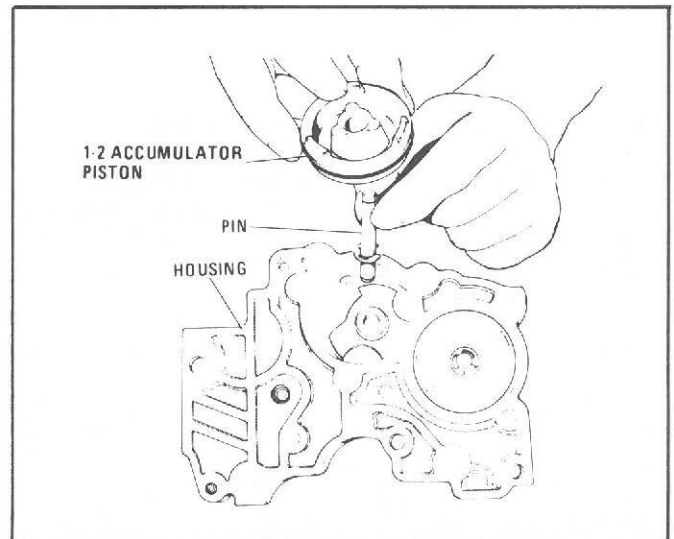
L-1—Removing the 1-2 Accumulator Piston
